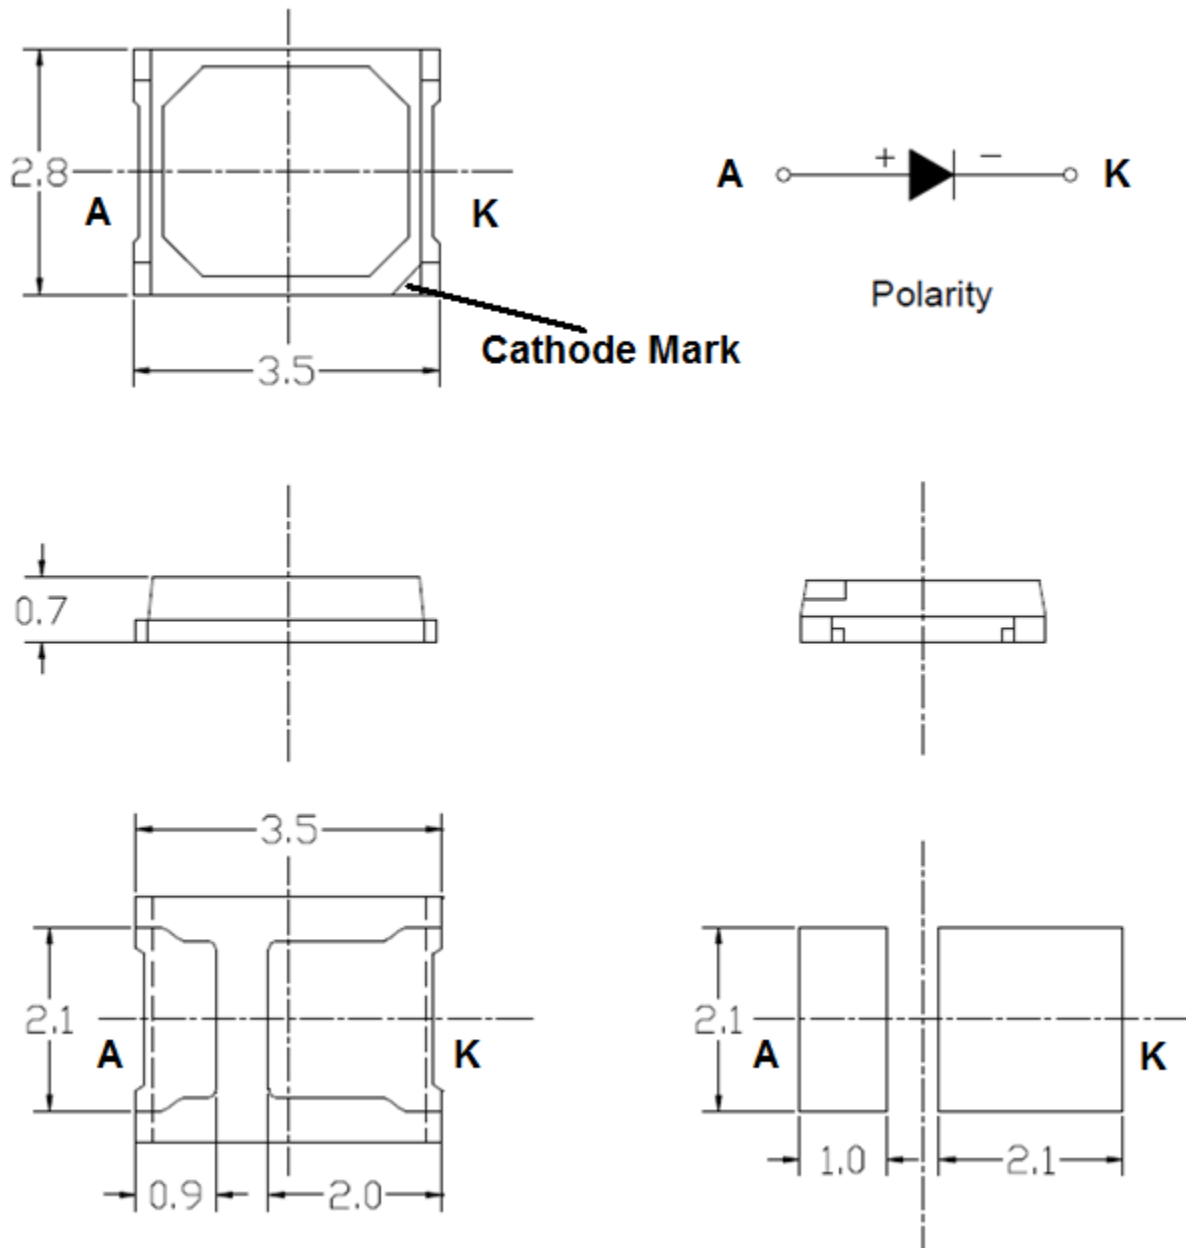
Mechanical Drawing & Soldering Pattern of the 2835 package
